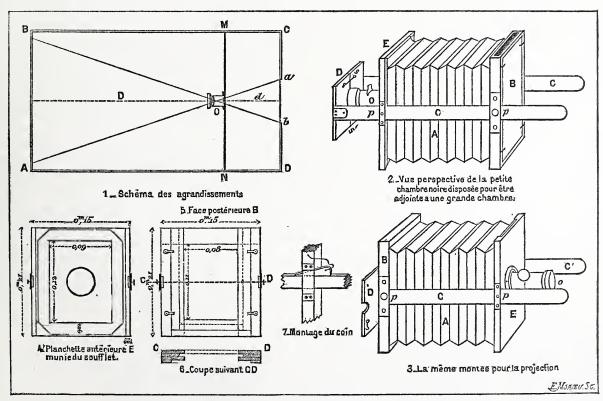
PLATE II.—DETAILS OF CONSTRUCTION OF SMALL CAMERA FOR PHOTOGRAPHIC ENLARGING.
